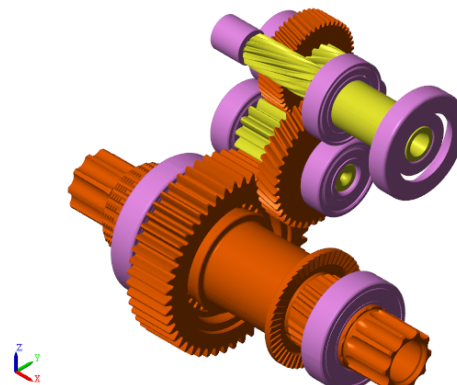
Multibody model of gears and toothed shafts (with bearings)
